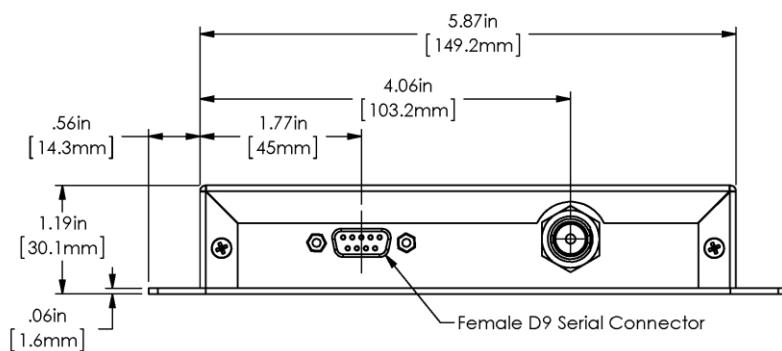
SV-ADSB-470 Dimensions/Connections (front view)
